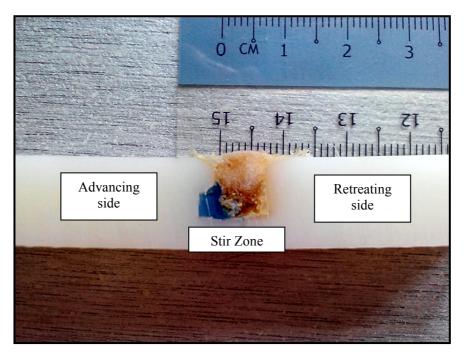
Cross-section of the butt weld joint at 40 mm/min
